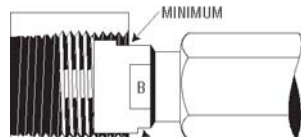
Gaging internal American National Taper pipe threads with working gage. When the internal thread is chambered, the gaging point shall be the intersection of the chamber and the pitch cone of the thread.
